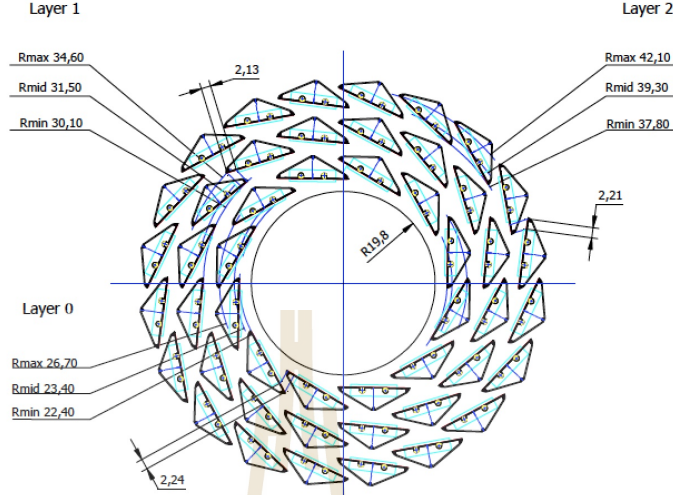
Layout of new ITS Inner Barrel (ALICE Collaboration, 2014a).
